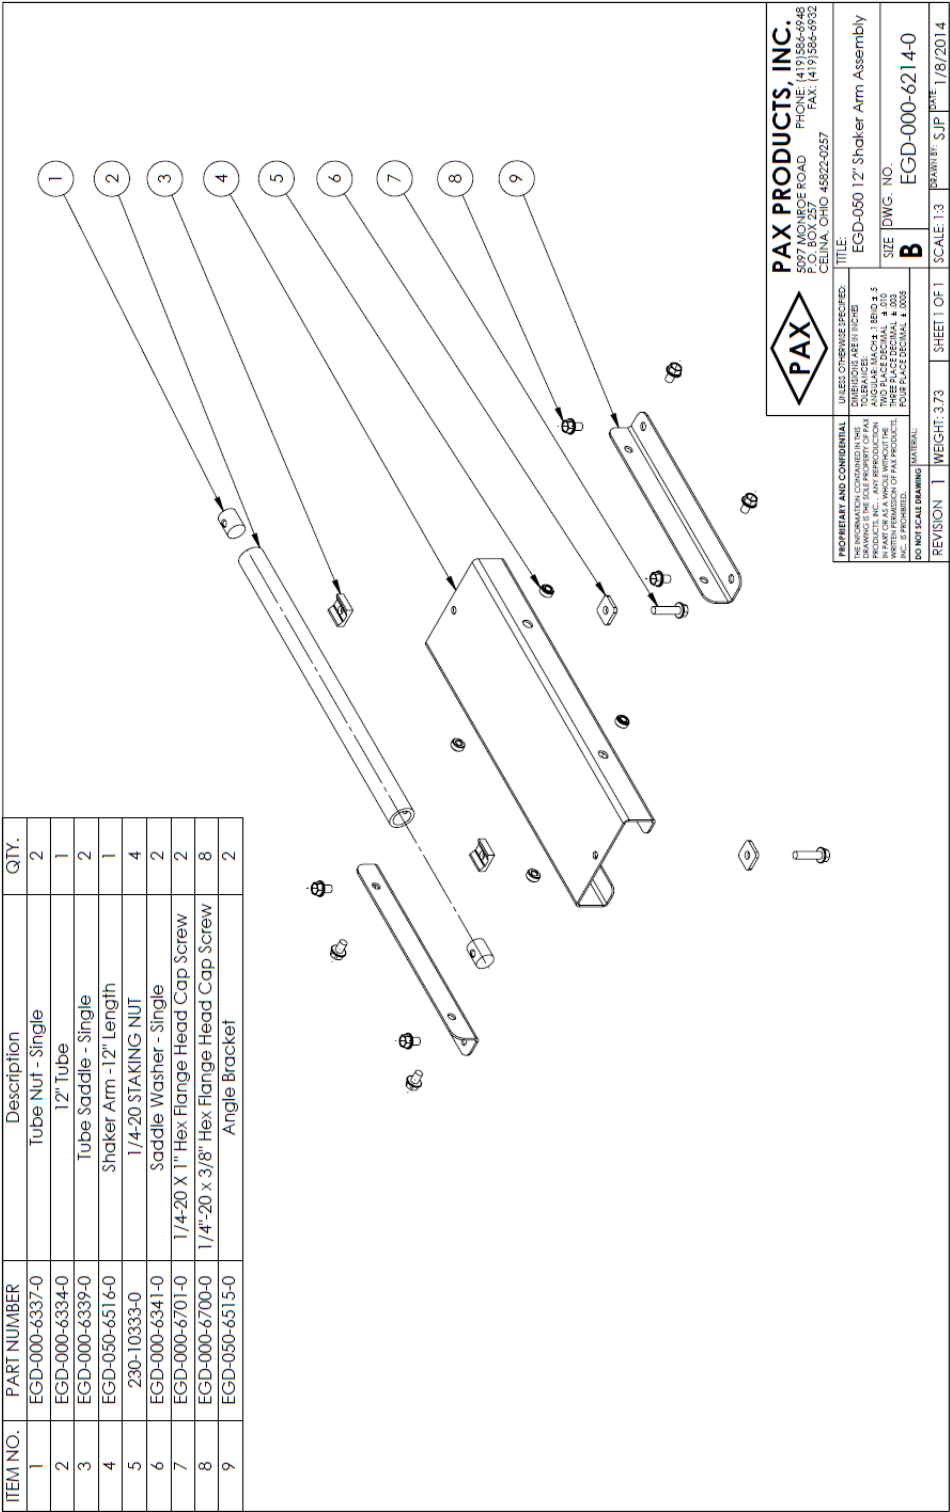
EGD-000-6214-0 EGD-050 12" SHAKER ARM ASSEMBLY
